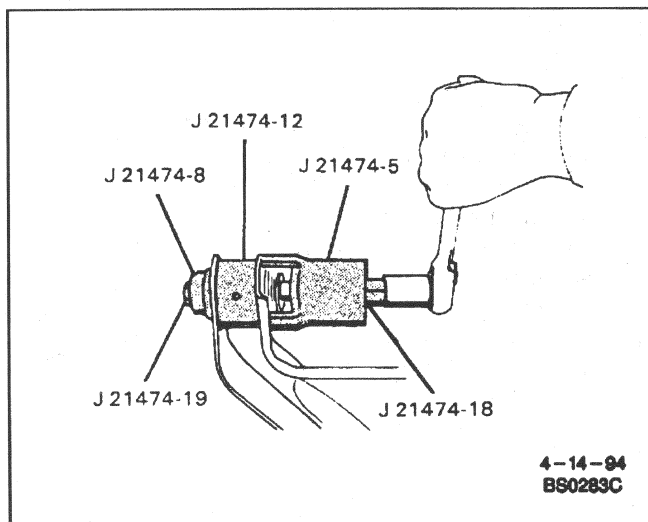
Removing Front Lower Control Arm Rear Bushing
